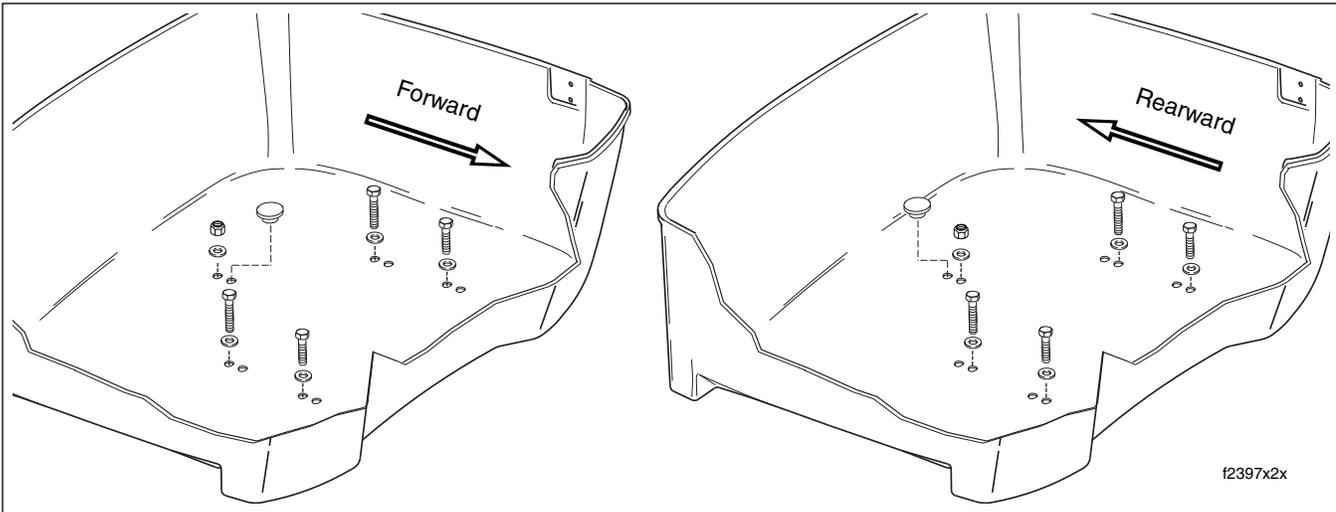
Adjust Position of Tour-Pak for Passenger Comfort
